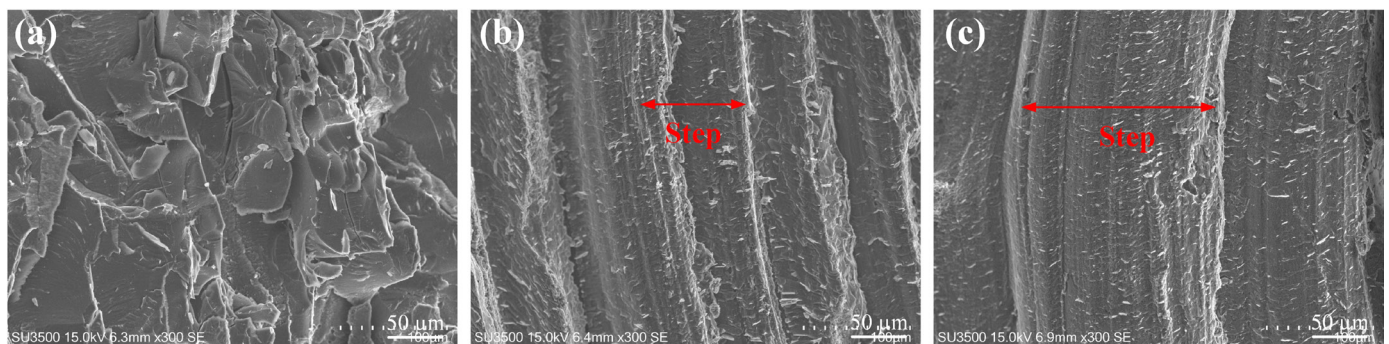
Enlarged views of fracture surfaces: (a) region A marked in Fig. 11a; (b) region B marked in Fig. 11c and (c) the similar location to region B in the joint at 200 mm/min
